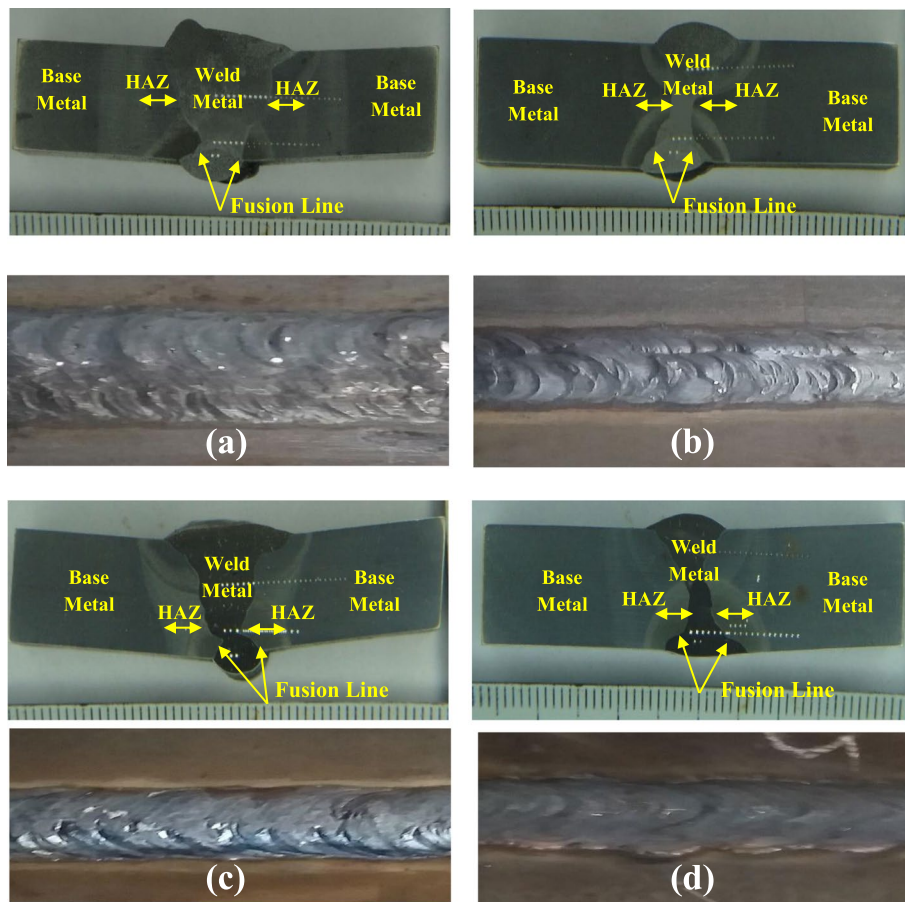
Weld face of the final weld beads and macrograph of welded sample. a Single V using AWS A 5.18 ER70S-6 with cooling. b Single bevel using AWS A 5.18 ER70S-6 with cooling. c Single V using AWS A5.9 ER307 with cooling. d Single bevel using AWS A 5.9 ER307 with cooling
